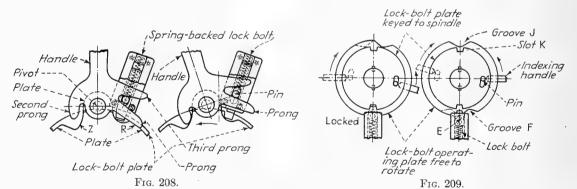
The handle is mounted on the plate and is independent of the lock-bolt plate. As the handle is pulled to the left, the prong pushes against the pin driven into the spring-backed lock bolt, thereby disengaging the bolt. At the same time, the second prong contacts the plate at Z. Both plates then move simultaneously, releasing the lock bolt, which rides on the periphery of the lock-bolt plate, and the bolt falls into the next slot. The handle is then pushed back again, clockwise, contacting the plate at R, upon which a third prong pushes against the pin-seating lock bolt in a locked position.
